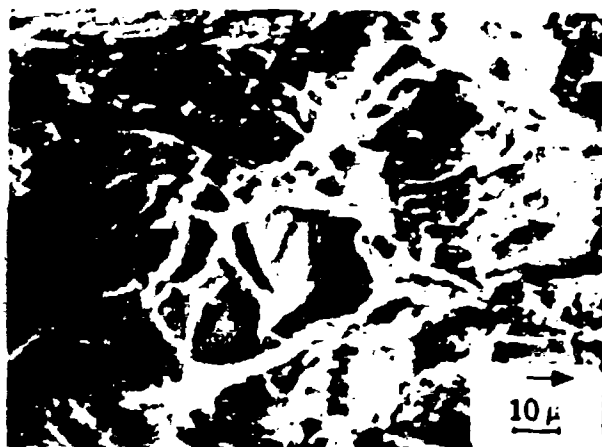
Fracture Surface of Specimen B, 15-5 PH, H 1100 Heat Treat Condition, Tested under a One Minute Hold-Time Trapezoidal Wave, $R = 0.05$, in 3.5% Salt Water. Location of fractographs to original fracture surfaces with corresponding $DaDN$ and ΔK are in Table X. The arrow on the micron marker indicates crack growth direction.
